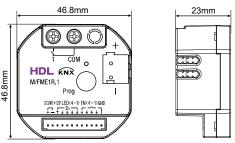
Dimensions - Front View Figure 4. Dimensions - Side View 1CH 16A Flush-mounted Switching Actuator (EU)
